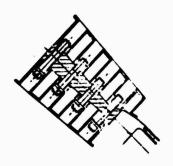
Thrust Chamber Assembly; Bouble-Panel Aerospike
